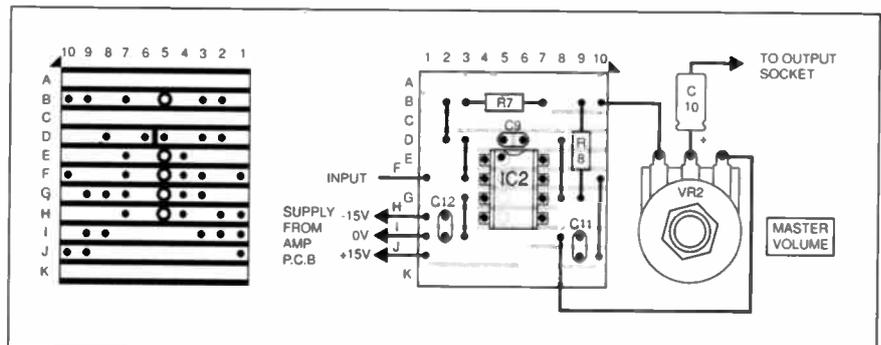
Suggested stripboard component layout and wiring for the Mono Mixer.
